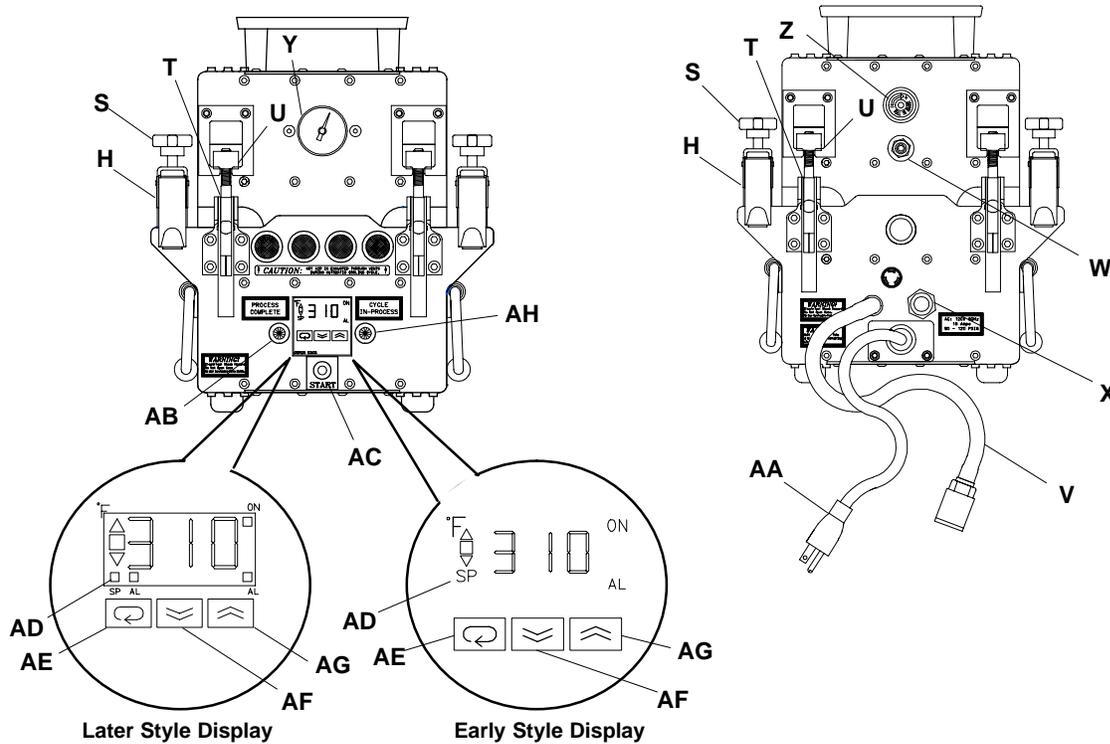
Heat Press - Front Side View (left) & Back Side View (right)
